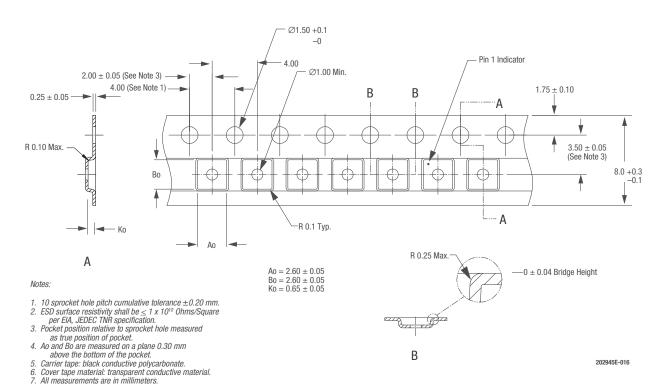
SKY16602-632LF Tape and Reel Dimensions
